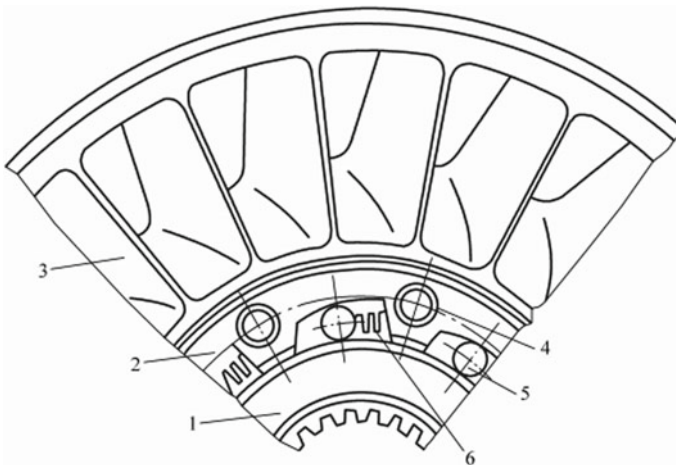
Roller type one-way clutch of hydraulic torque converter. 1—inner race, 2—outer race, 3—guide wheel, 4—rivet, 5—roller, 6—laminated spring
